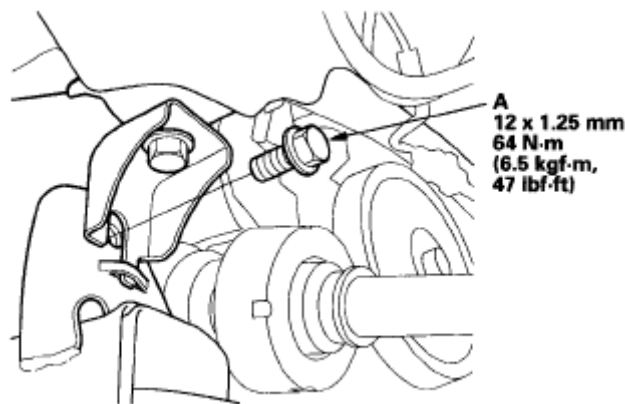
Identifying Front Subframe Middle Mount Bolt (With Torque Specifications)
